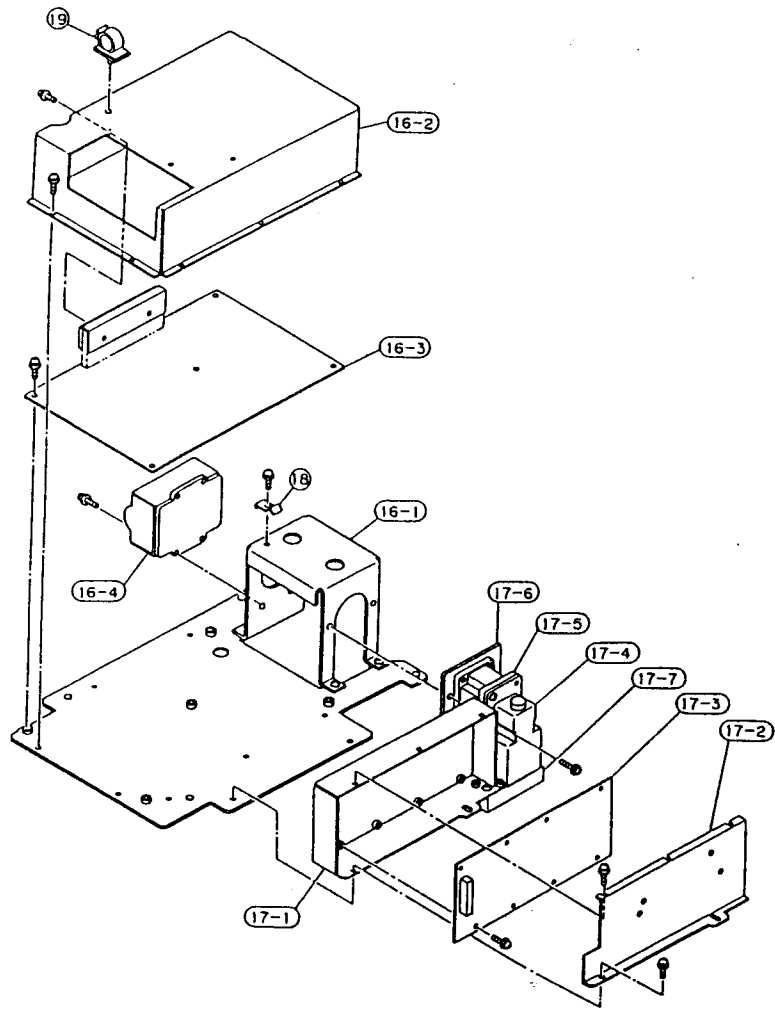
ASSEMBLY DRAWING OF R11X OPEN ARRAY SCANNER UNIT 2 OF 2
